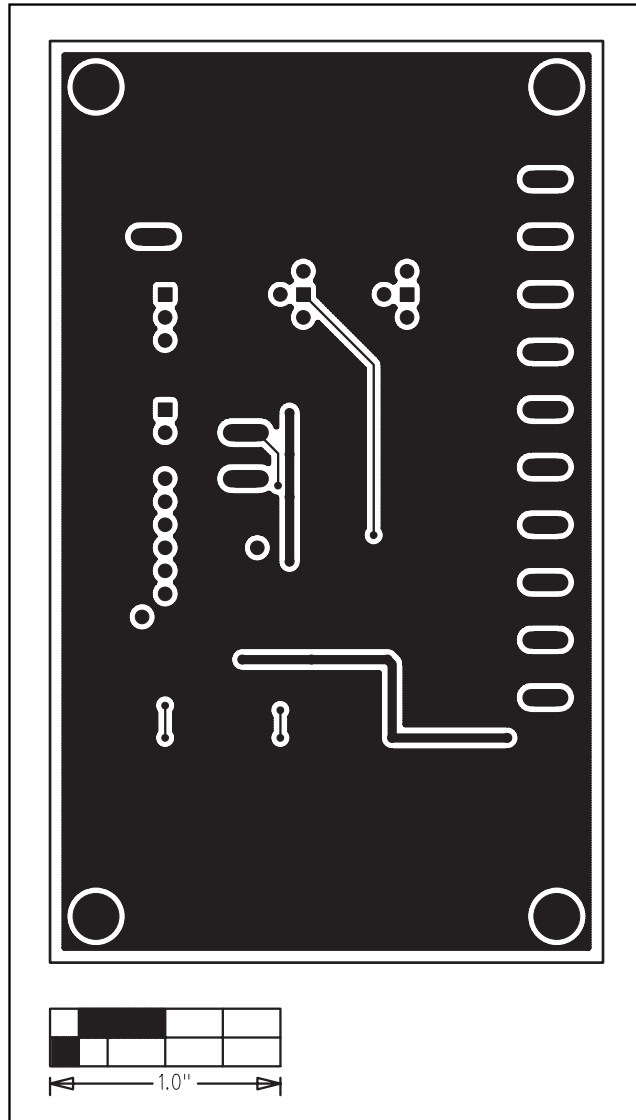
MAX7327 EV Kit PCB Layout—Solder Side
